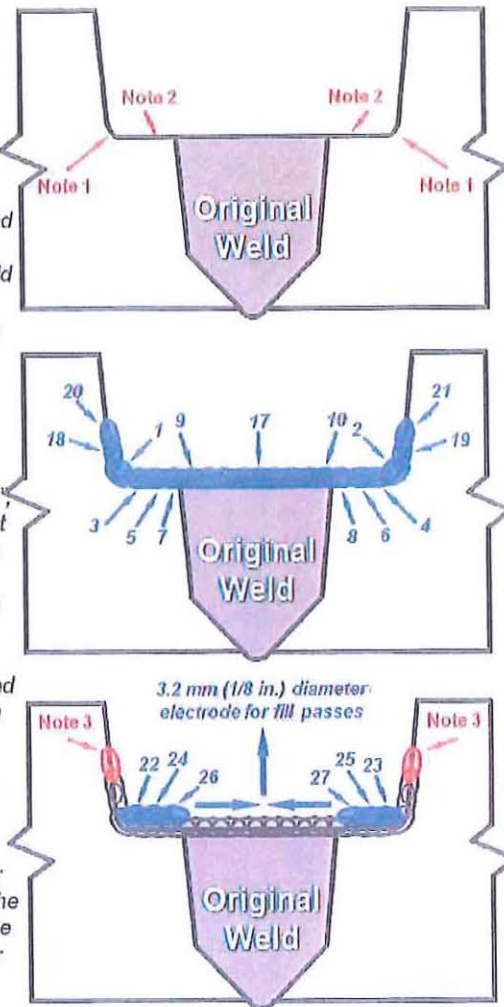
Schematic of the Controlled Fill Welding Procedure for Grade 91 Steel for a Partial Weld Repair of a Circumferential Girth Weld.
